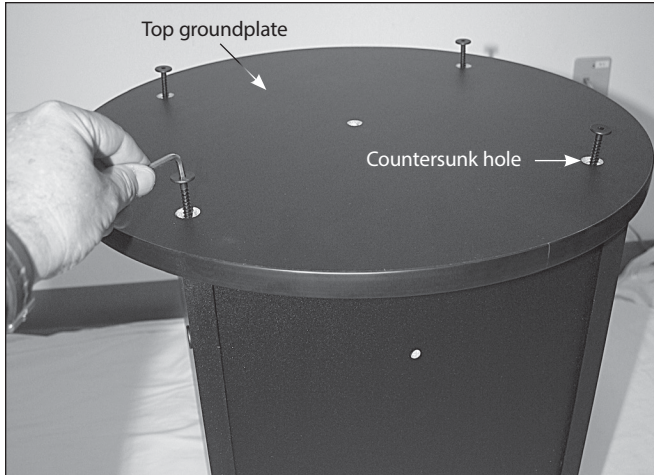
With the front and side panel assembly turned upside down, attach the top groundplate to the assembly with the countersunk holes facing up.
